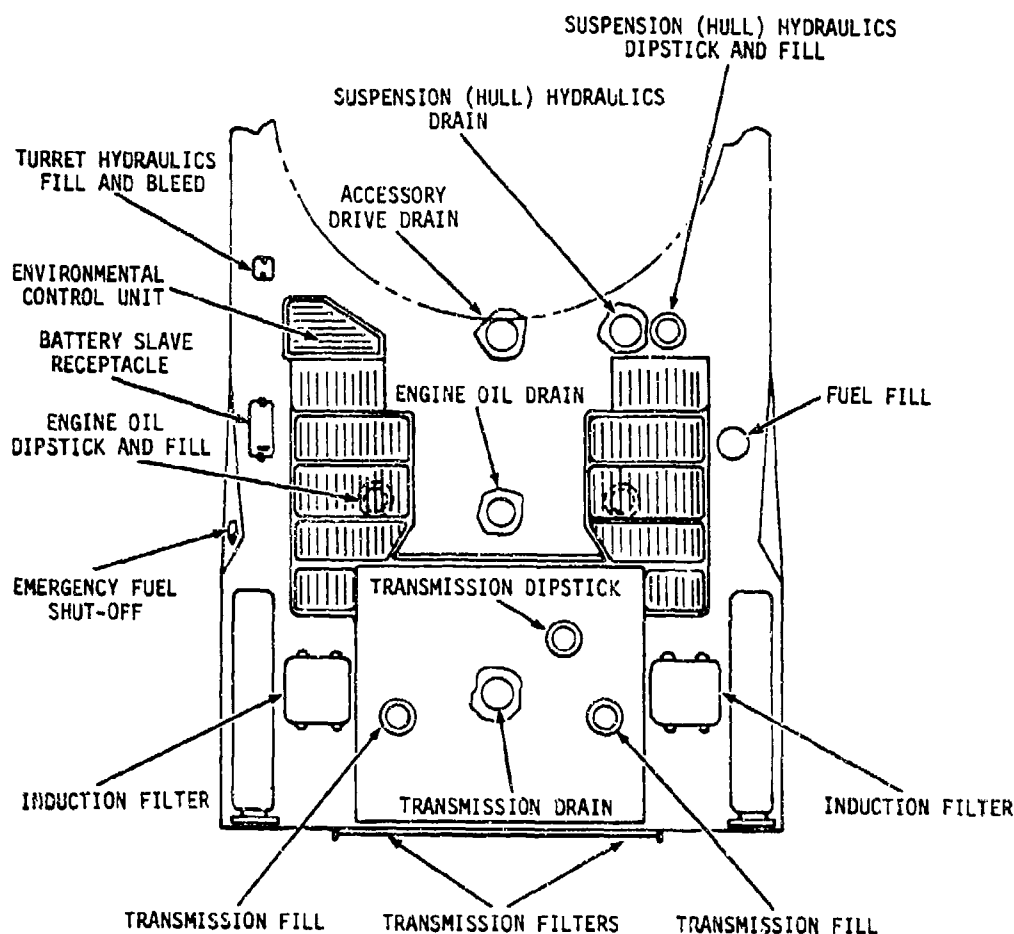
Service and Access Location for MBT70 Prototype Tank
